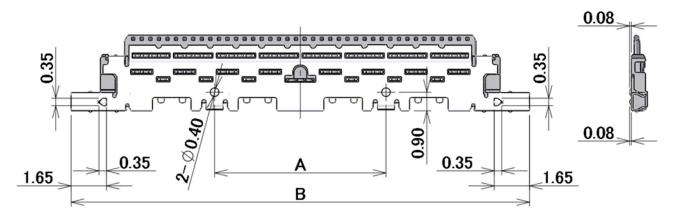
The SHELL bottom side of PLUG HSG ASS'Y
